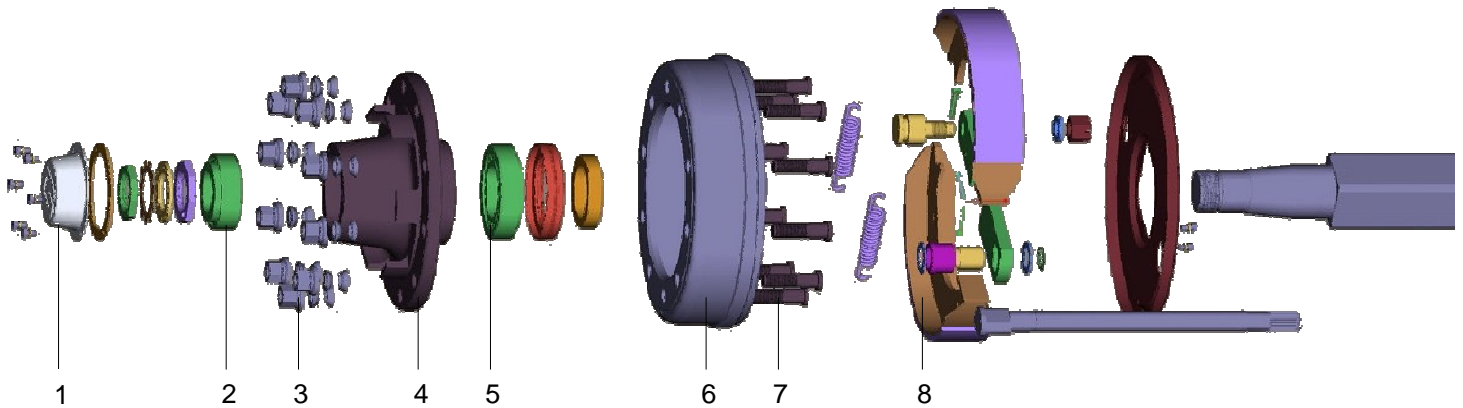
Mech-Fiber 400 Axle (Exploded View)
